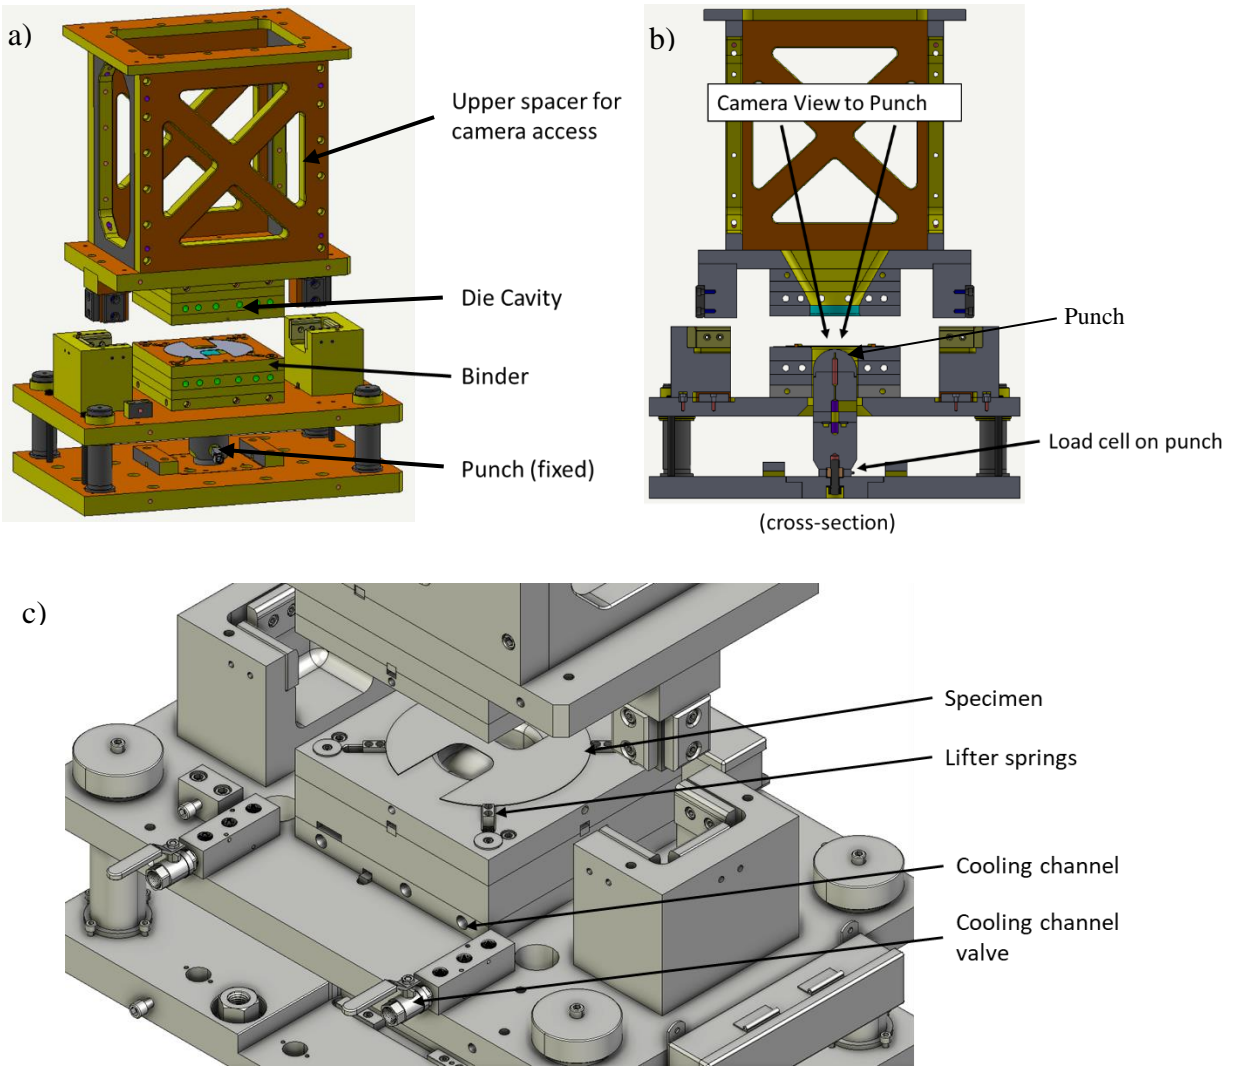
CAD of tooling assembly in isometric view (a) [130], cross section of CAD of tooling assembly (b) [130], close-up CAD isometric view of die assembly (c)
